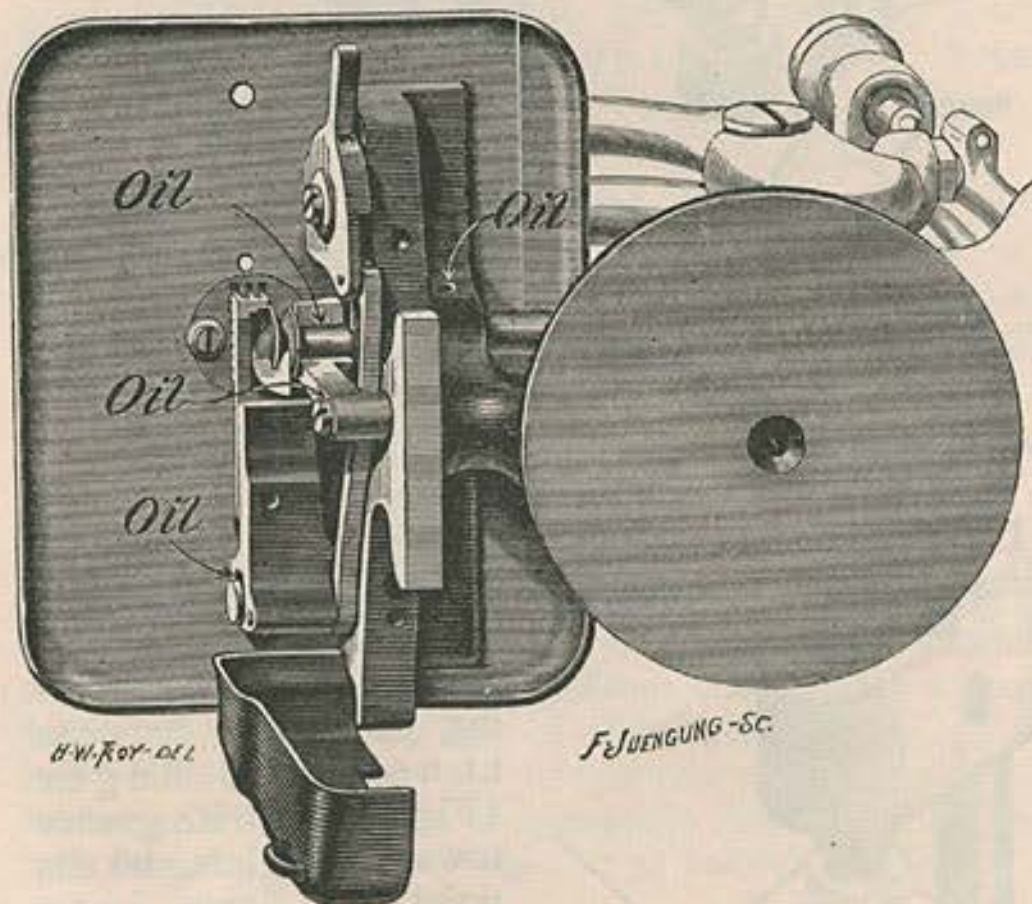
Shows Places to be Oiled *underneath* Cloth Plate in our *Earlier Automatic* and B Sewing Machines, which do *not* have "Oil Holes" in Cloth Plate.
